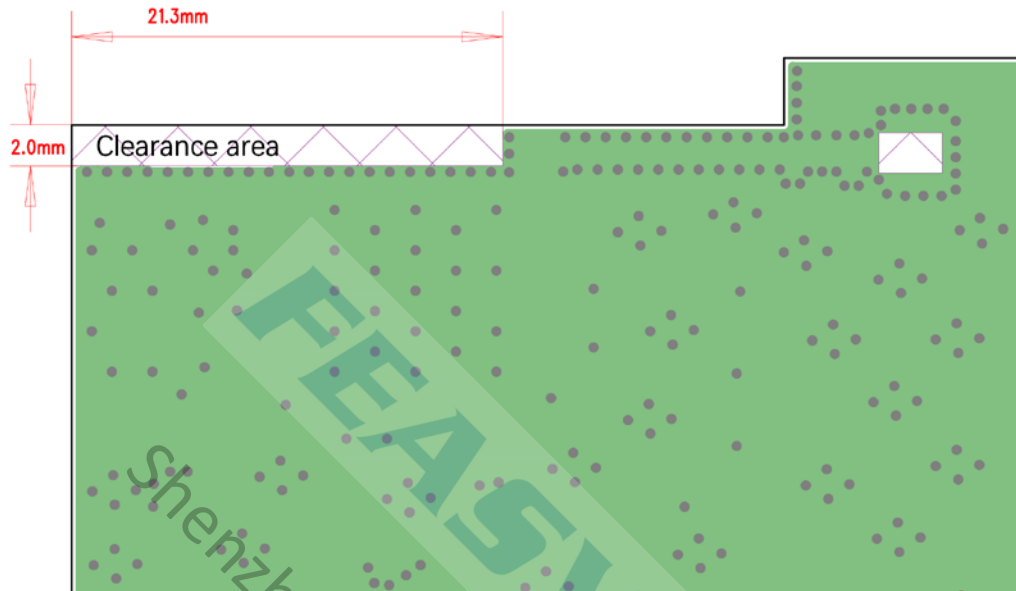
Module Layout - Main Board L2/L3/Ln...../BOTTOM Layers
